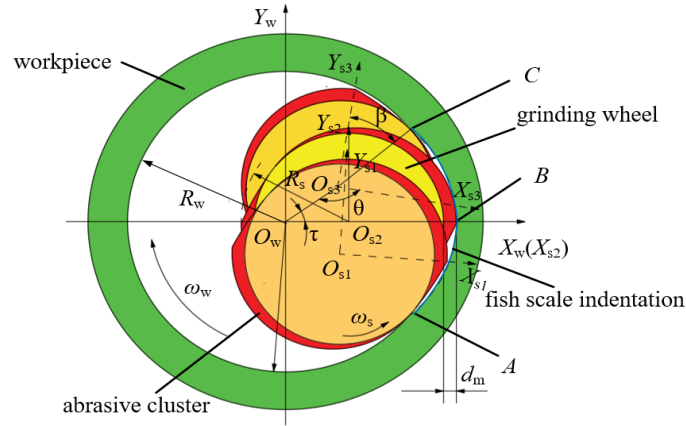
Schematic diagram of grinding with a grinding wheel on the inner cylindrical surface.
